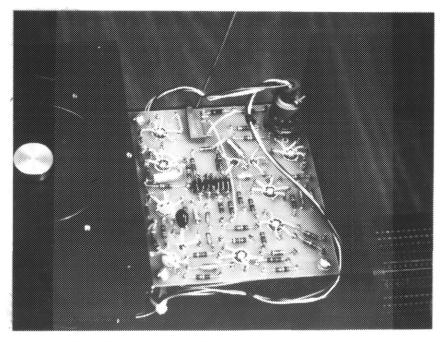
Photograph of Tuning Fork Chopper Drive and Control Electronics Circuit Board
